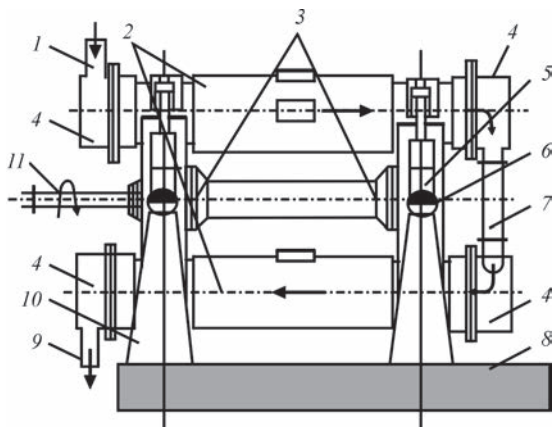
Scheme of vibration mill PALLA-U of the Company KHD HUMBOLDT WEDAG; 1 — loading branch-pipe; 2 — tube mill chambers; 3 — units of unbalanced vibrating exciters; 4 — replaceable end bottoms of mill chambers; 5 — tube bundles; 6 — shock absorbers; 7 — transfer sleeve; 8 — vibration-insulated foundation; 9 — outlet fitting-pipe; 10 — fixed frame; 11 — driven shaft
